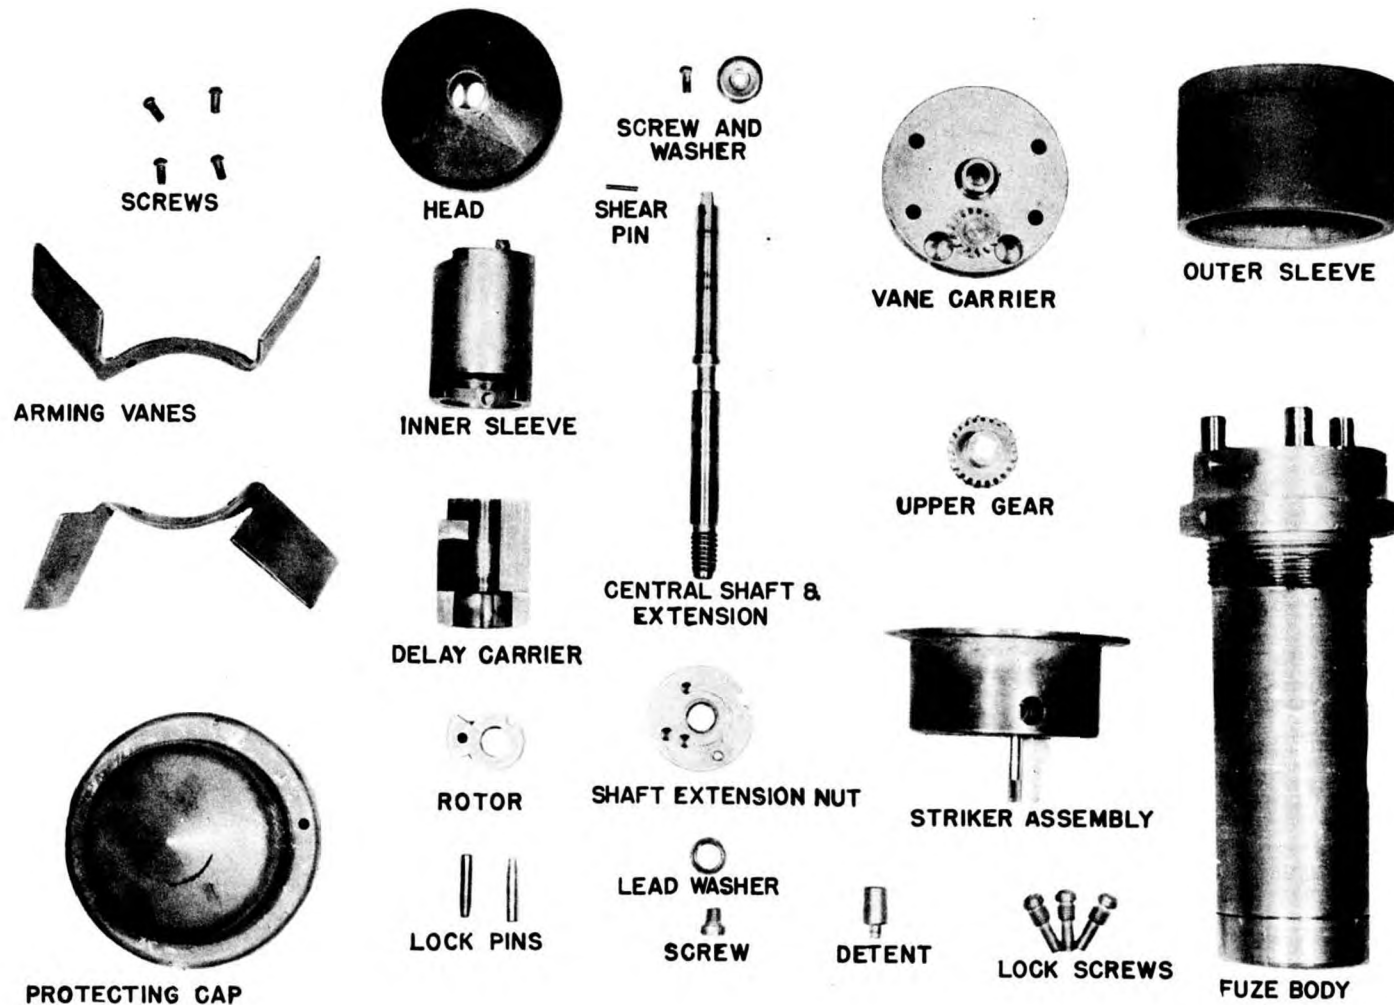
BOMB FUZE MARK 221: DISASSEMBLED PARTS
